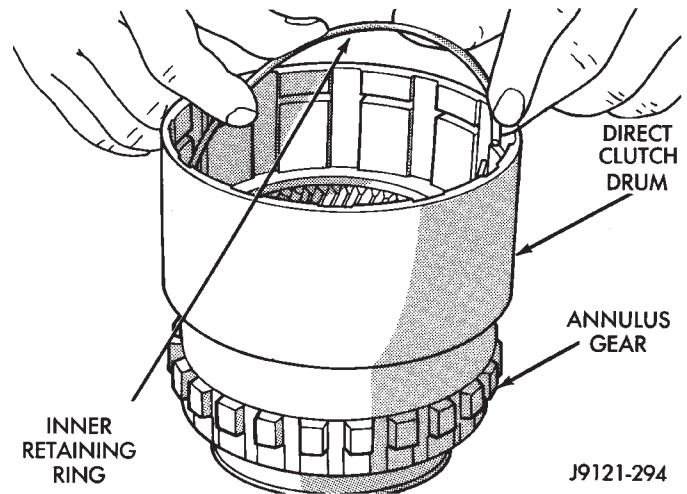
Installing Clutch Drum Inner Retaining Ring
